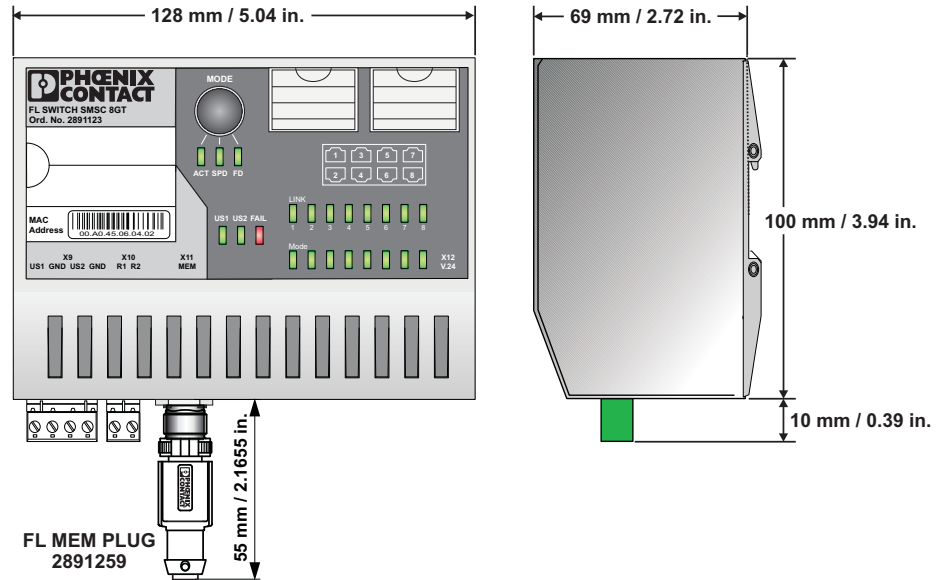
Housing dimensions of the SMCS (8-port version) in millimeters/inches
